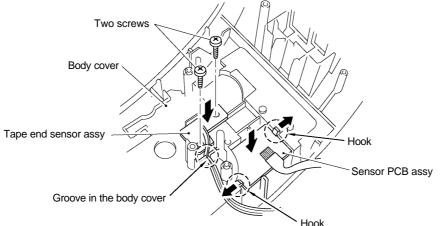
Reassembly of the Sensor PCB Assy and the Tape End Sensor Assy
